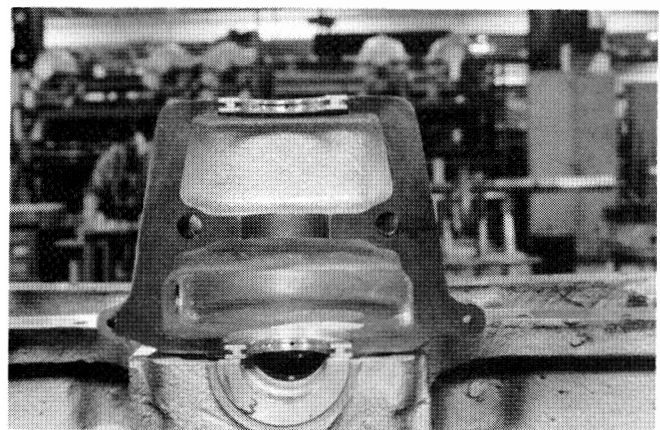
Small Turbine Showing Purge Gas Entrance into Bearing Housing Seal.
